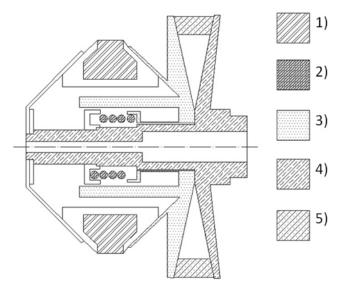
Drive pulley scheme. 1) Masses, 2) Helical spring, 3) Floating surface, 4) Fixed surface, 5) Rubber V-belt.
